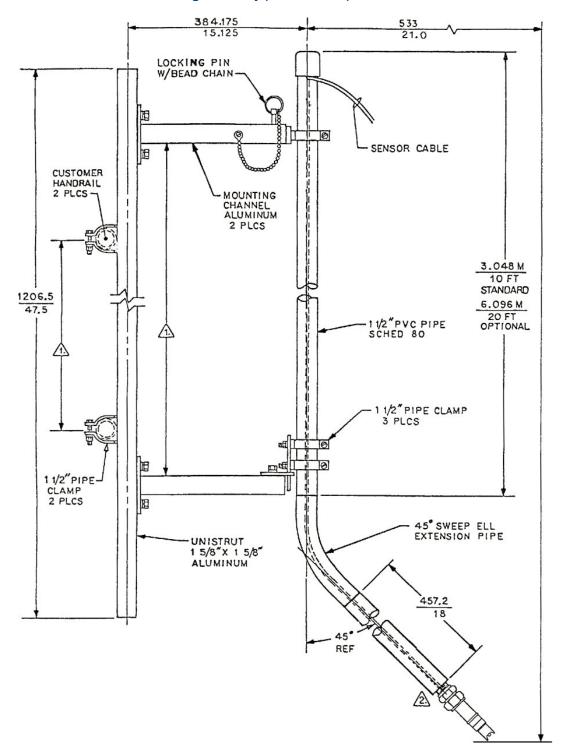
Rosemount 3500P or 3500VP for Submersion Installation using the Handrail Mounting Assembly (PN 11275-01)
